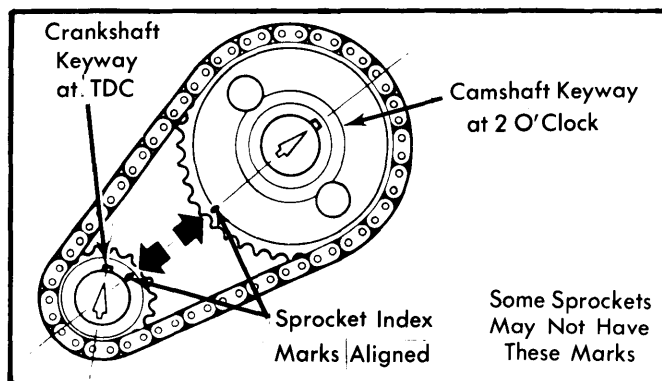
Camshaft and Crankshaft Sprocket Alignment
